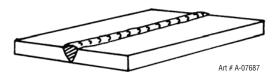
Flat Position, Down Hand Butt Weld
